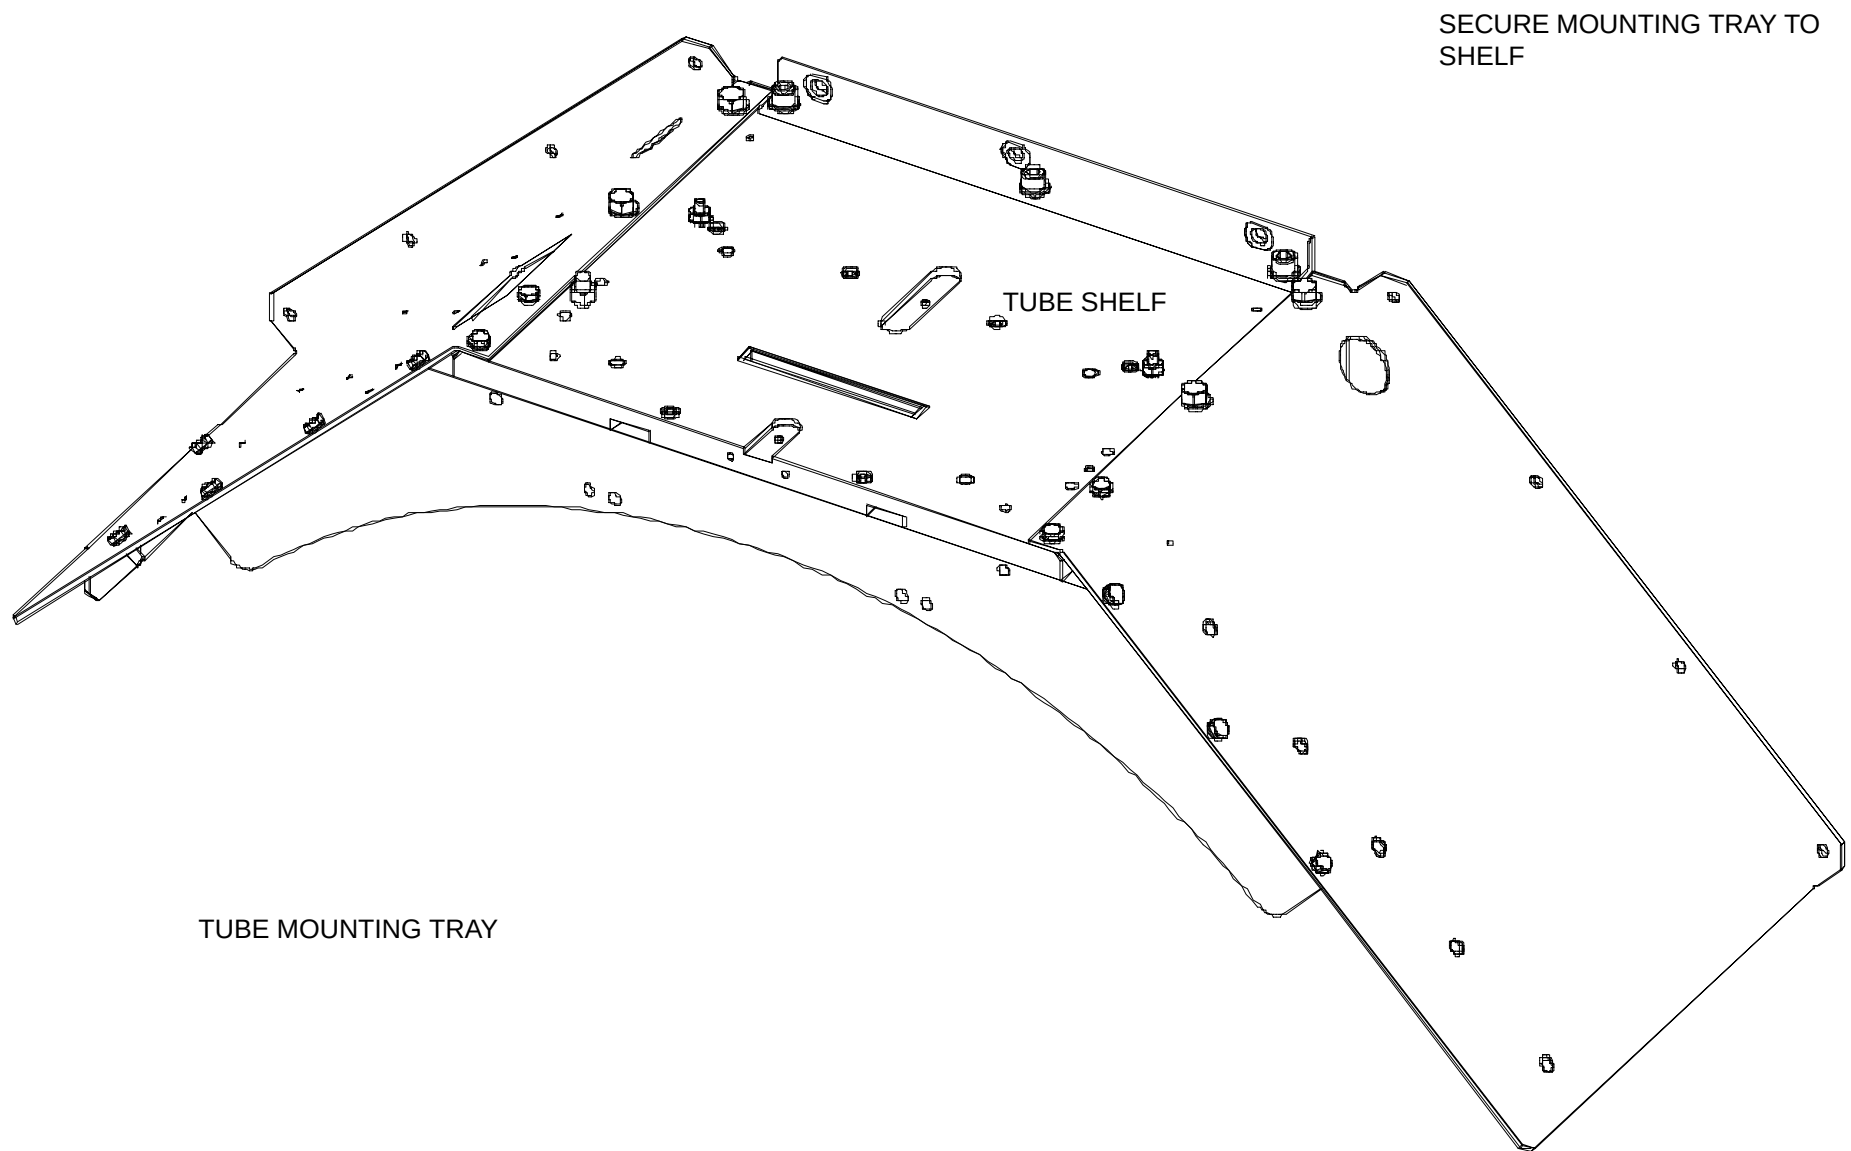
XRAY TUBE MOUNTING TRAY ON TUBE SHELF
